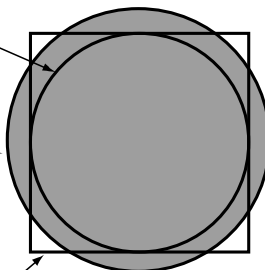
Footprint - 3 mils stencil -non solder mask defined
